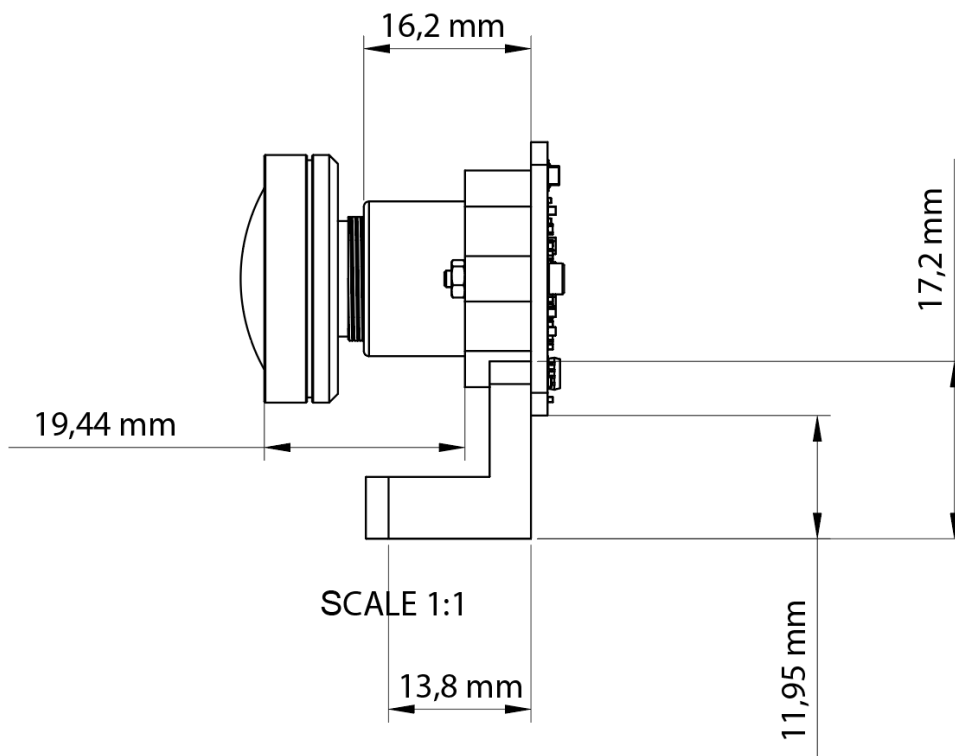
Mechanical drawing: FRAMOS Sensor Module (FSM) of the FSM-IMX636 Devkit
